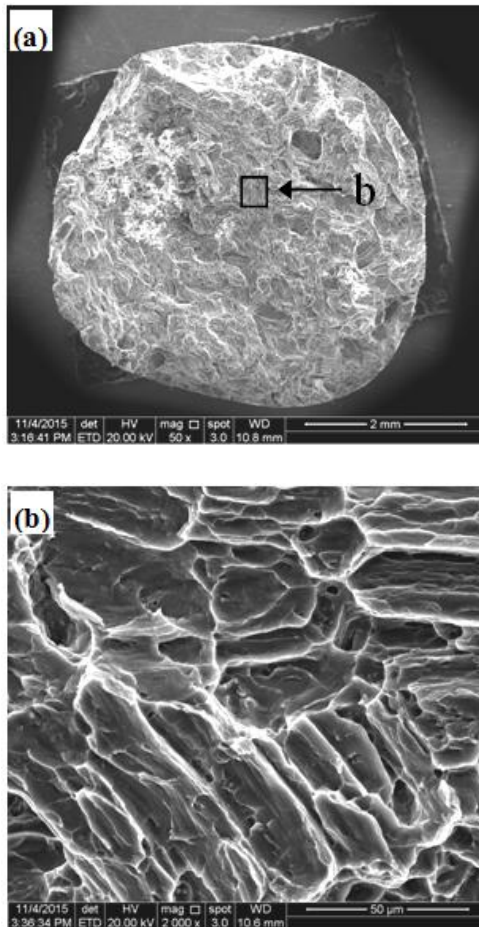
Fracture morphology of as-cast AZ31 alloy: (a) the whole fracture morphology of as-cast AZ31 alloy, (b) enlarged fracture morphology of the central zone.
